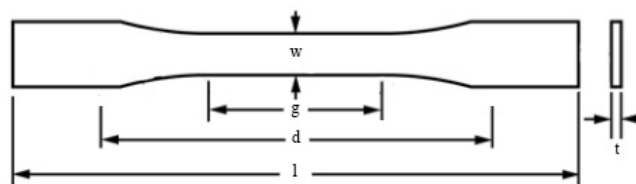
Standard tensile test specimen dimensions according to ASTM-D638-10
